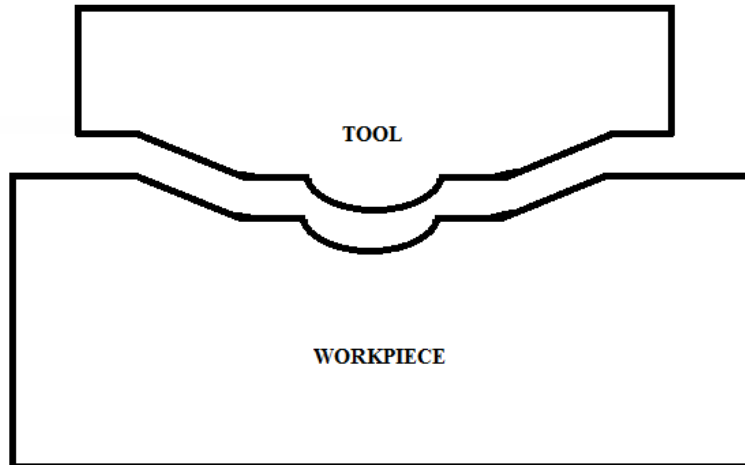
Tool shape and corresponding cavity formed on workpiece after EDM operation
